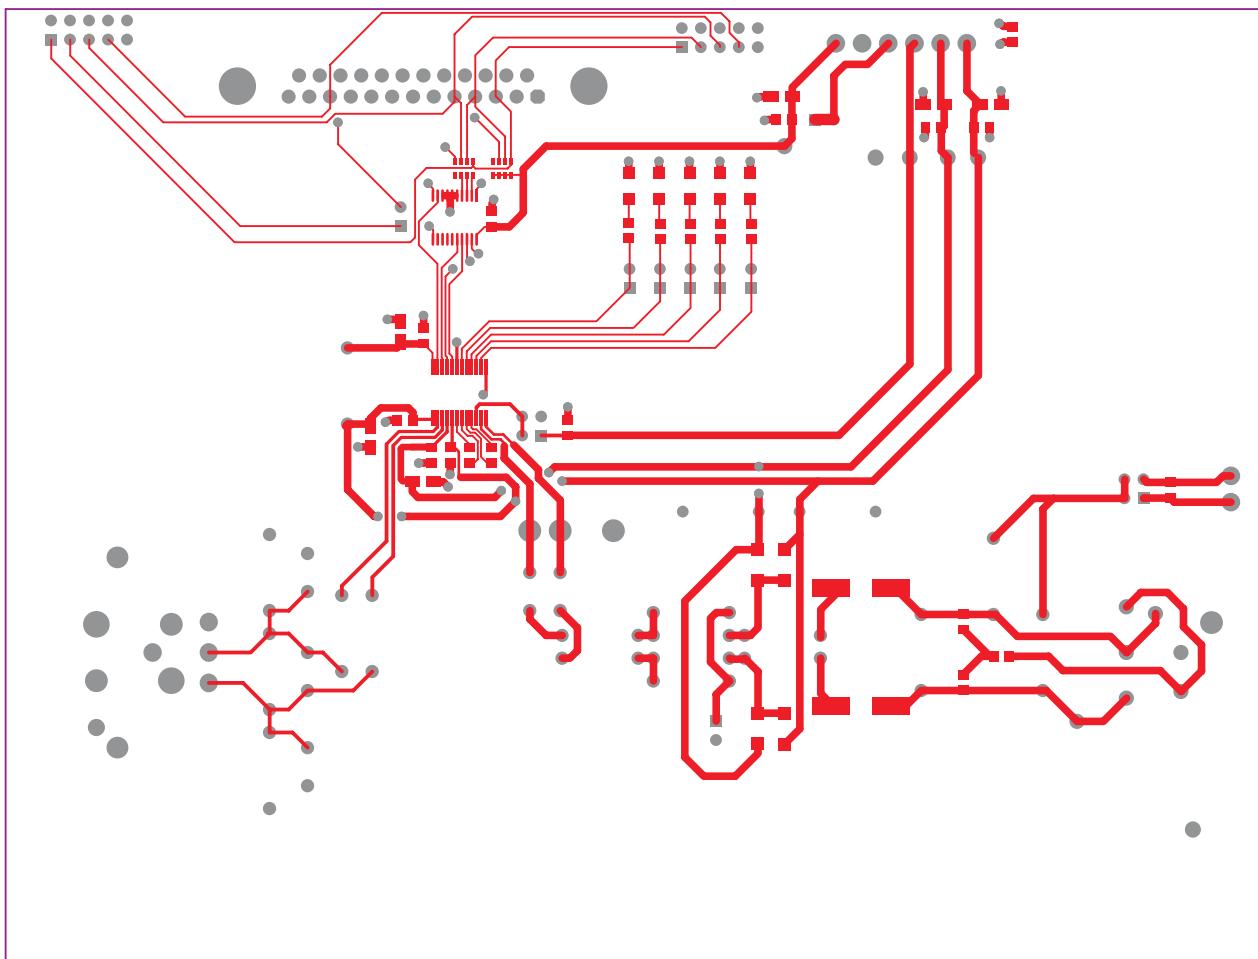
PGA2505EVM PCB Top Layer (Component Side)
